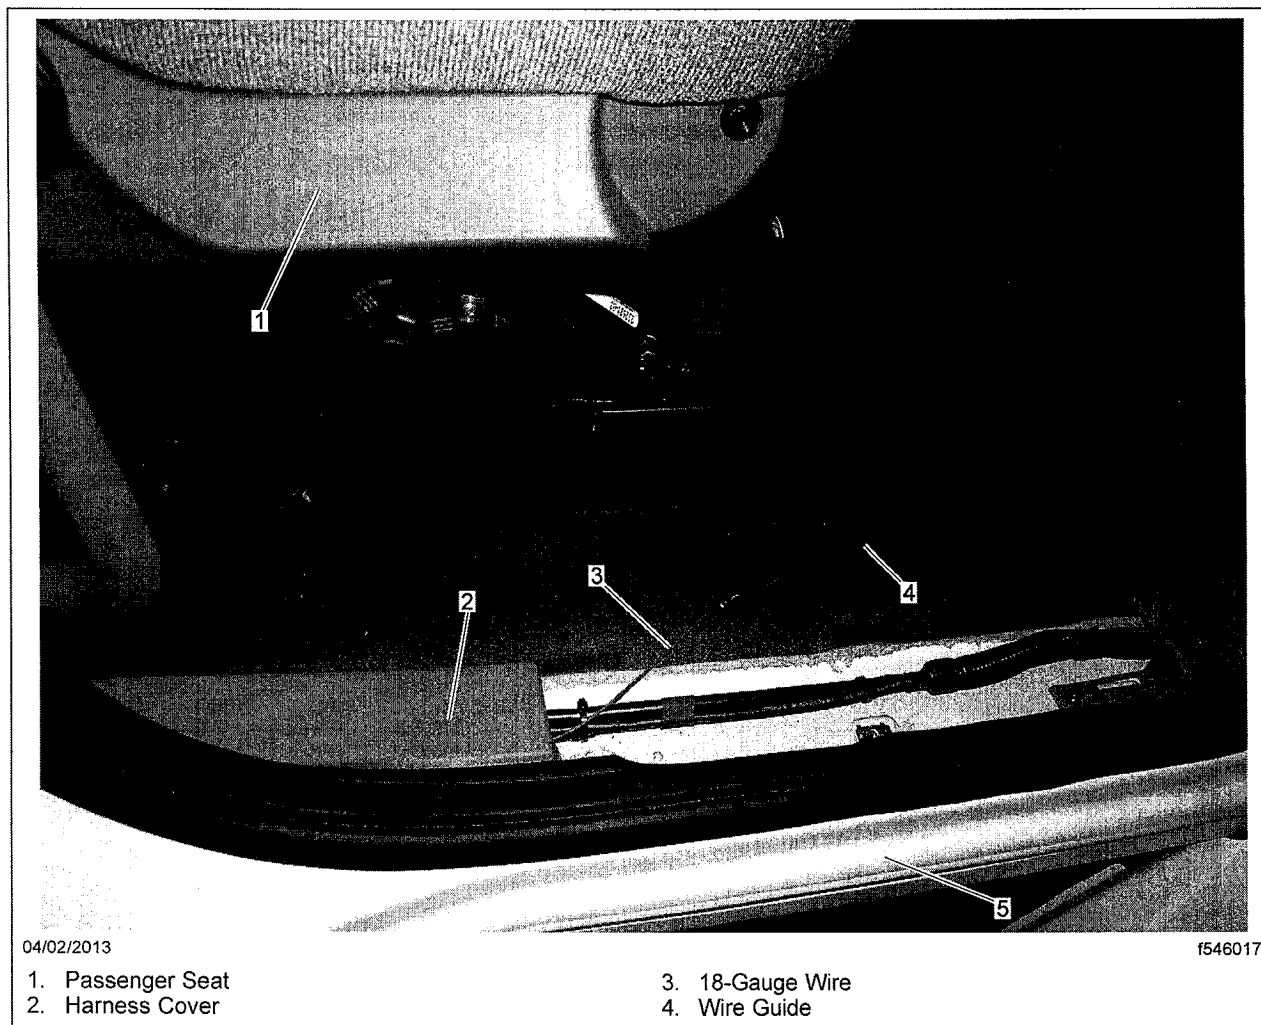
, Passenger-Side Wire Routing (tread plate removed)
